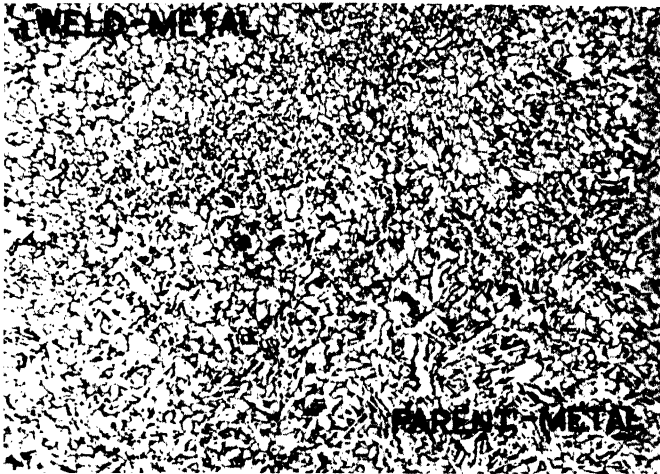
Satisfactory fusion weld in mild steel made by the oxy-acetylene method. $\times 50$ Dias
